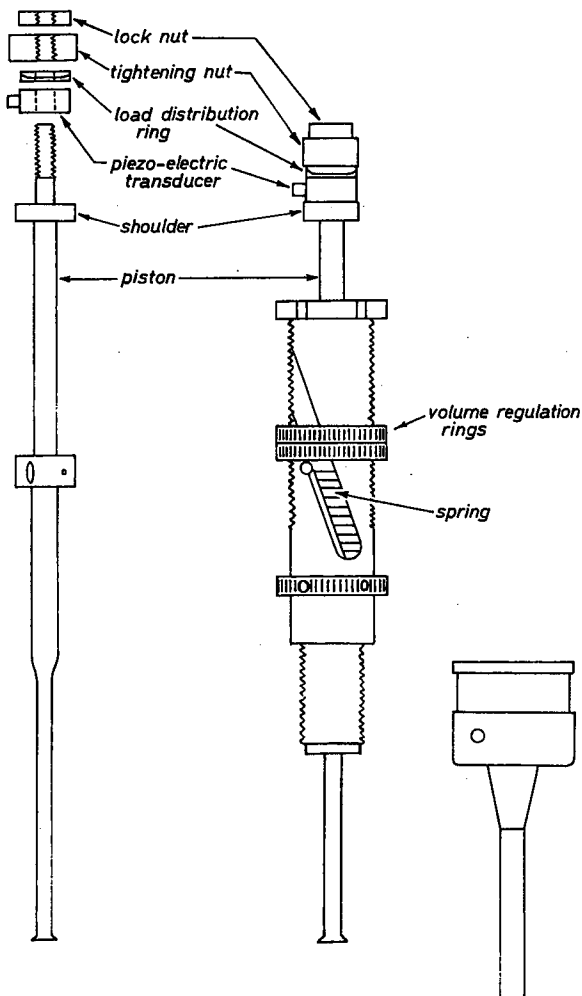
The dosator assembly with piezo-electric transducer, used on a Zanasi RV-59 capsule-filling machine.
